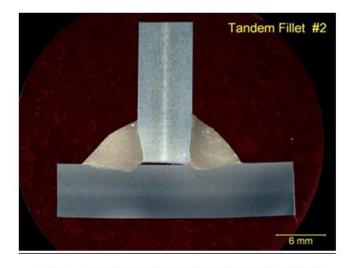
T-GMAW fillet welds made on ¼-in thick 6061 Aluminum at a travel speed of 60-ipm
